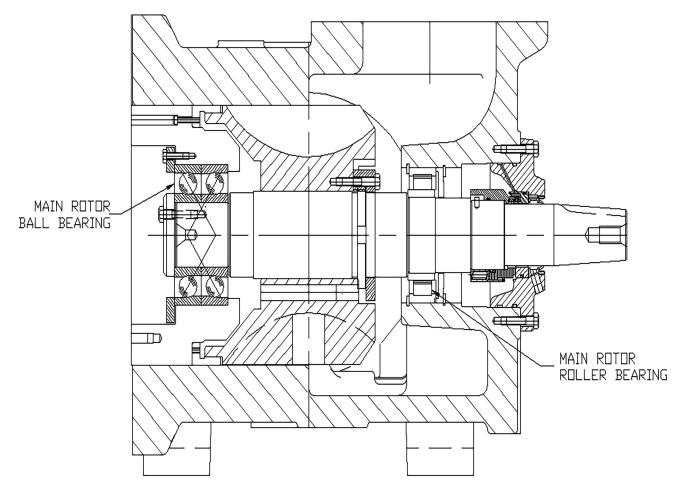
Main Rotor Cross-Section VSS/VSMC Compressors
